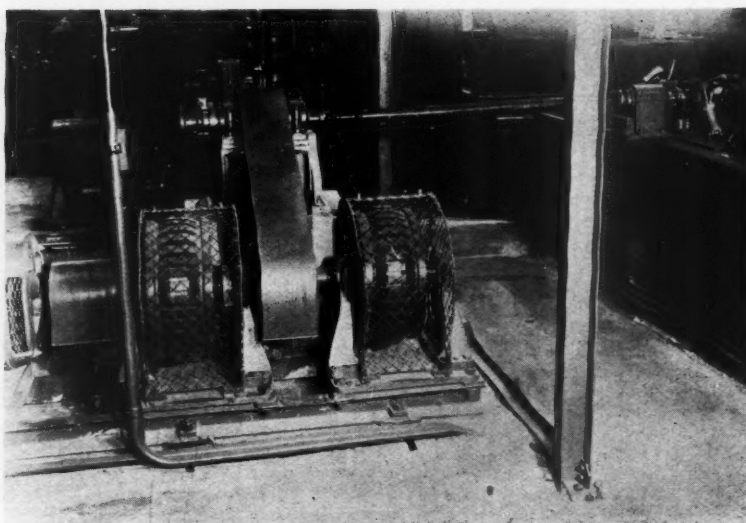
Couplings incorporated in the drive for the test unit shown in Fig. 8
